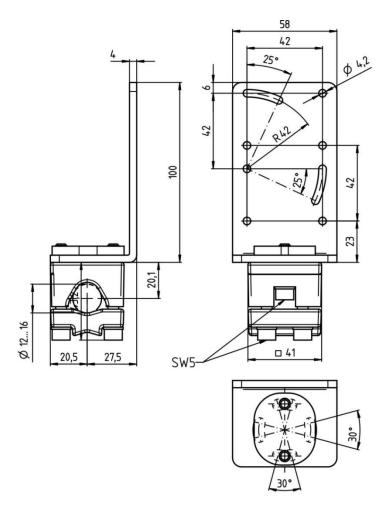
Dimension drawing BE 901 FA-003 mounting device (all dimensions in mm)
